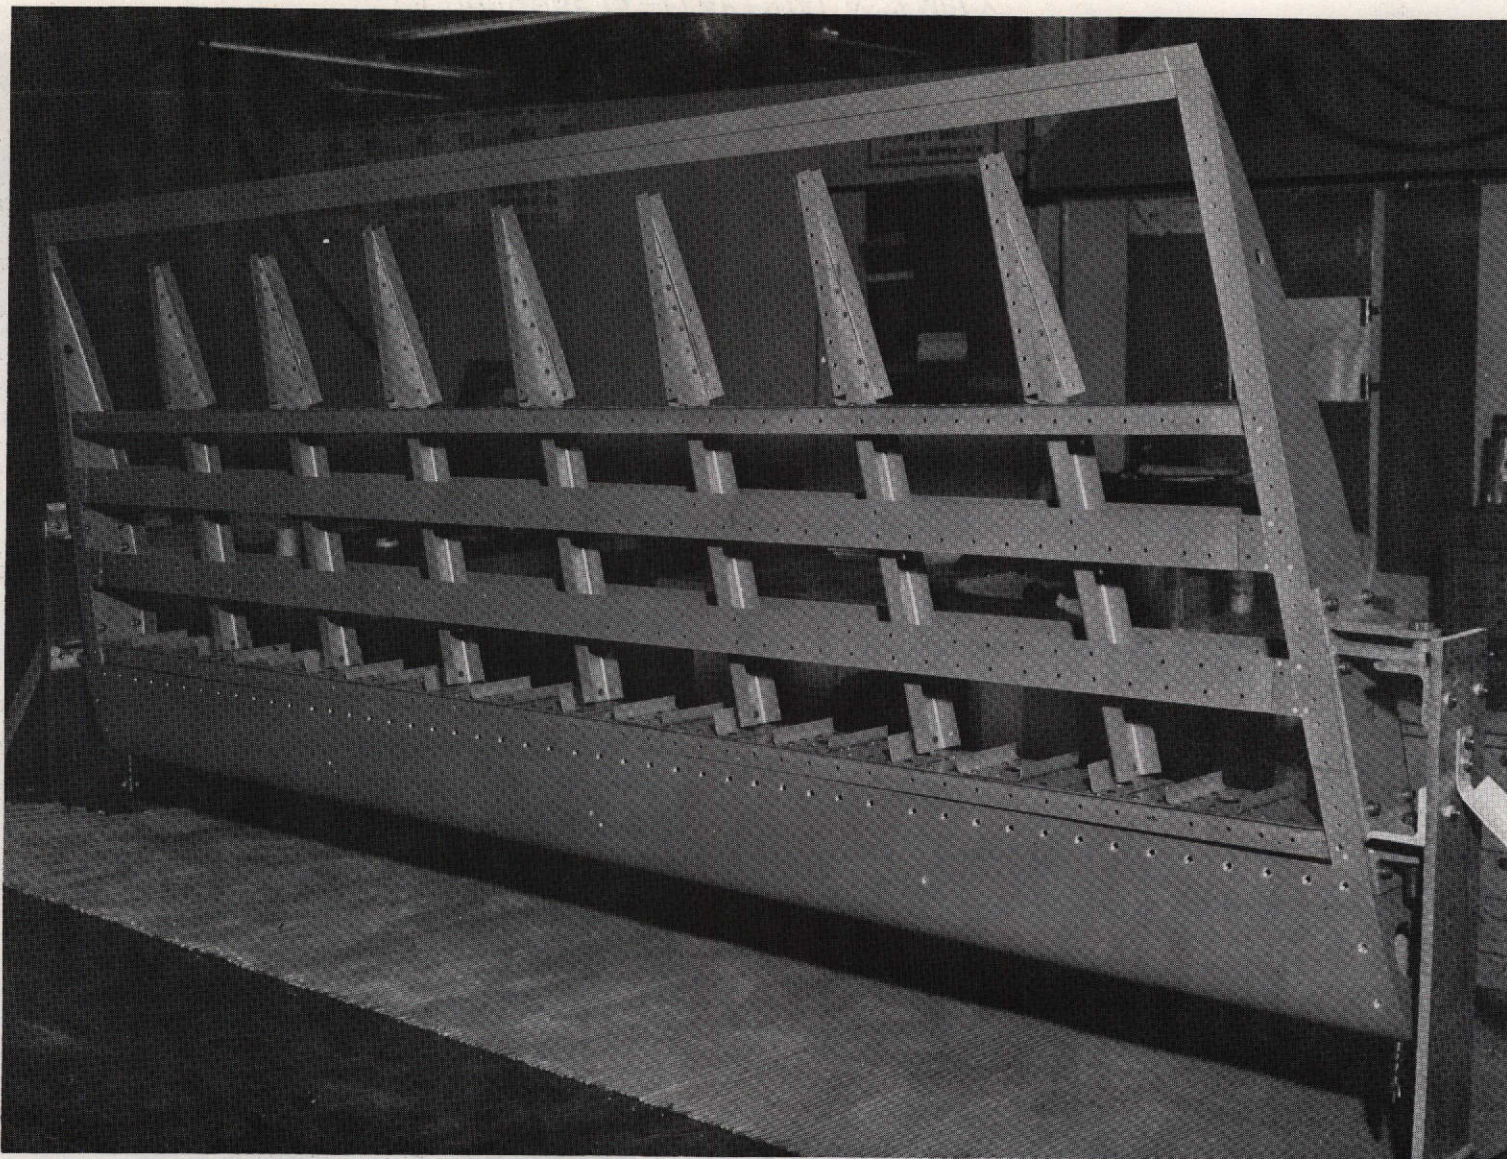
FLAP SUBASSEMBLY—LOWER SURFACE
